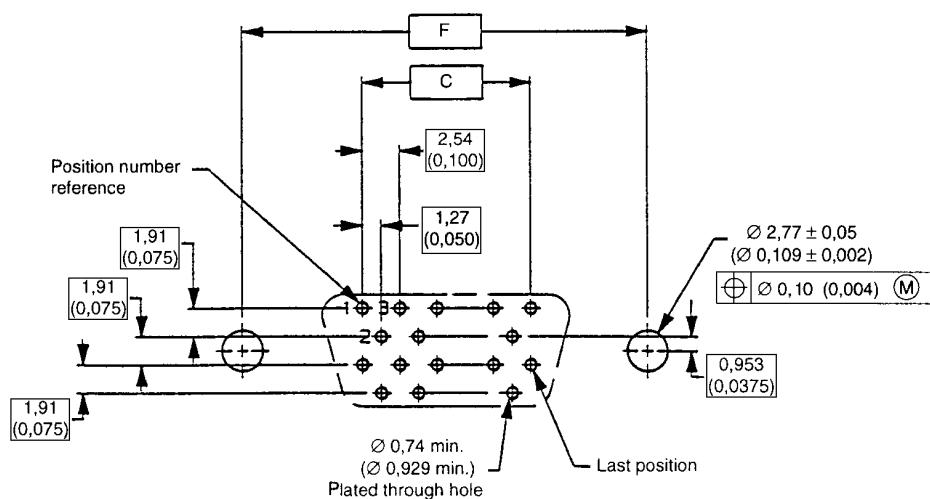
Detail for 10, 26, 38 and 50 positions, connector side of board
